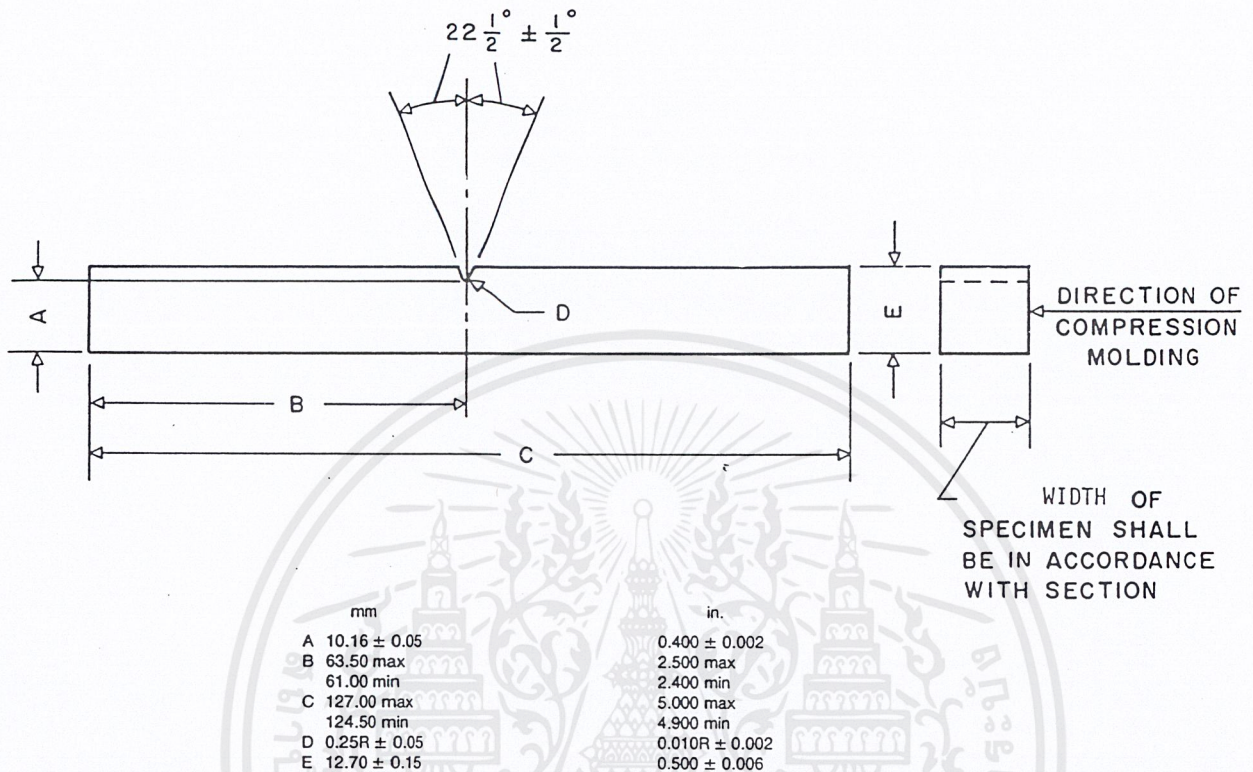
Dimensions of Simple Beam, Charpy Type, Impact Test Specimen
